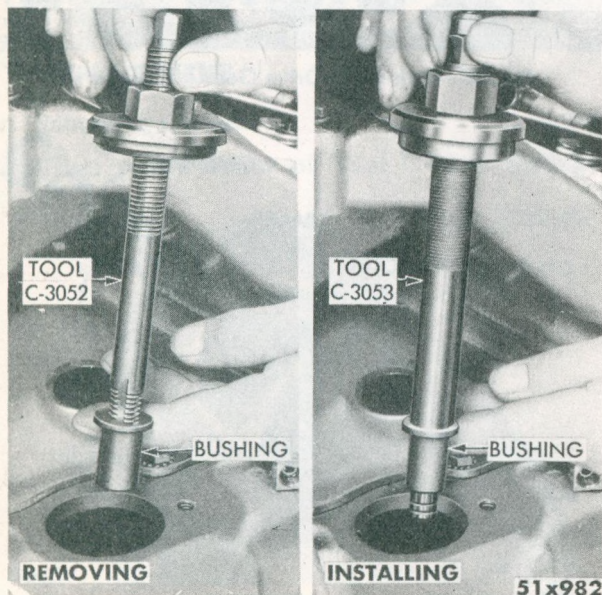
Removing and Installing the Distributor Drive Shaft Bushing
